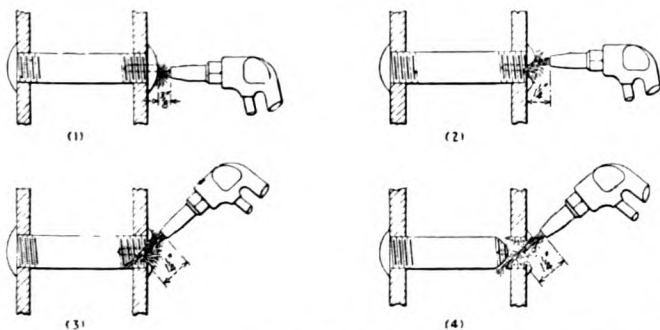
Procedure for removing staybolts by use of the cutting torch
